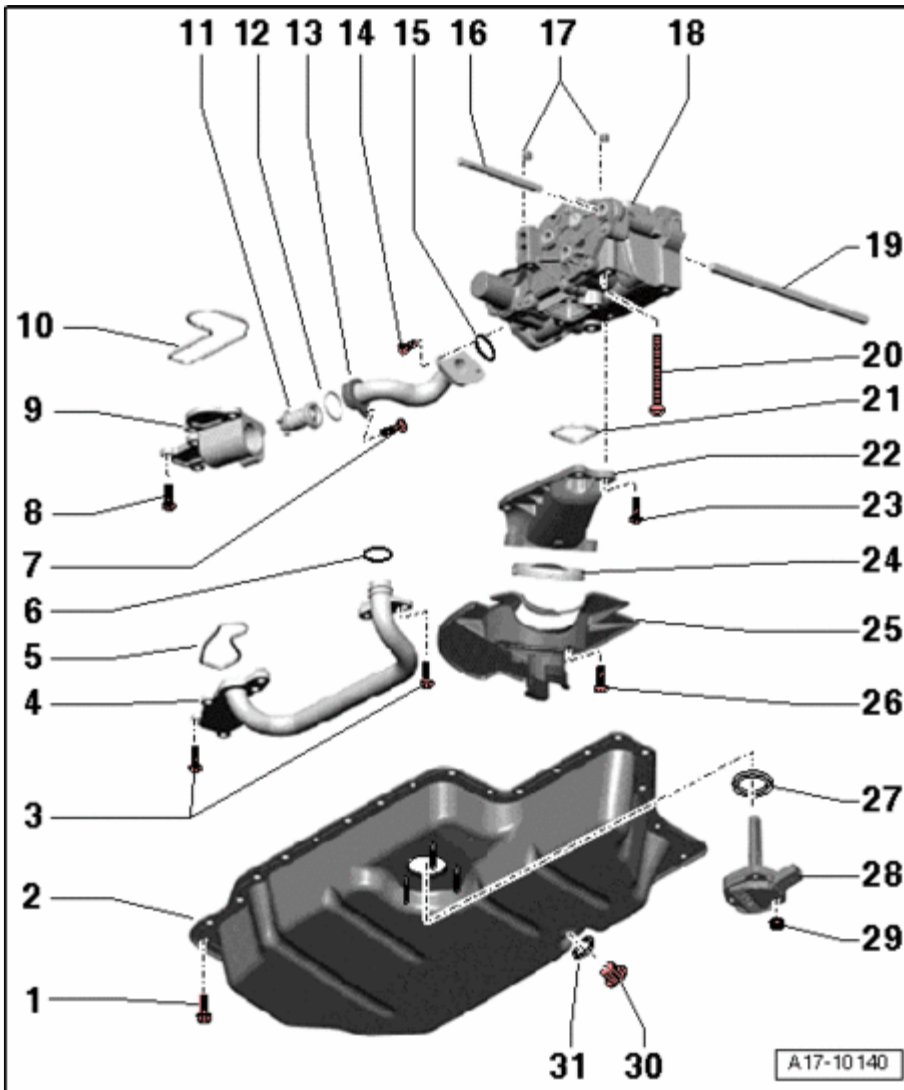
Oil Pump And Lower Part Of Oil Pan, Assembly Overview
